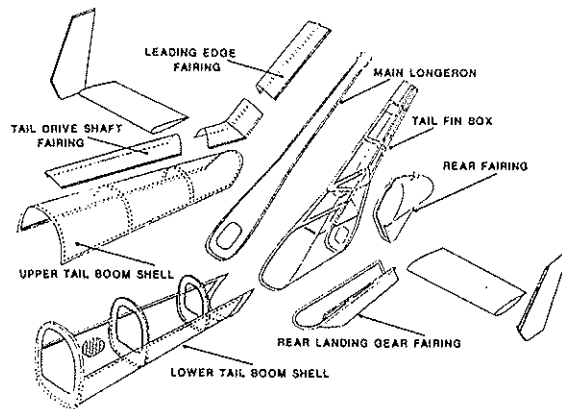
TIGER COMPOSITE FUSELAGE - AFT SECTION
